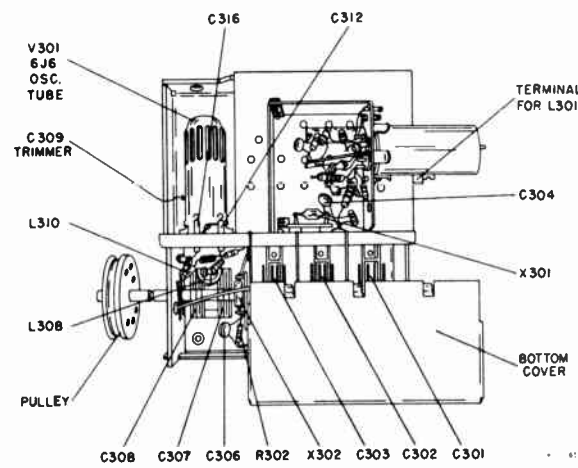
A. Parts Identification of 1E166 UHF Tuner
